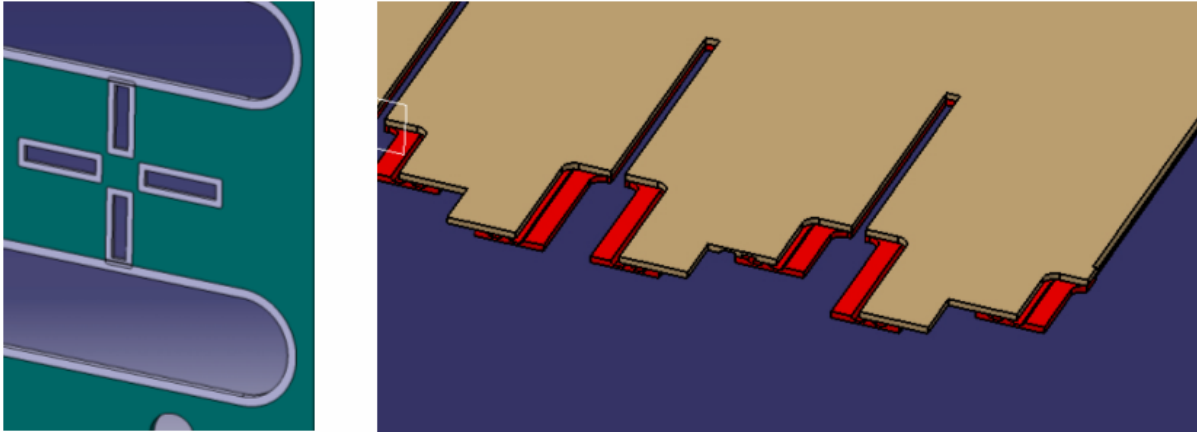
Left, Ref 1.0: decrease of TBM outer dimensions requires change of the manifold plate design → space for welding between grid and plates is no more sufficient
